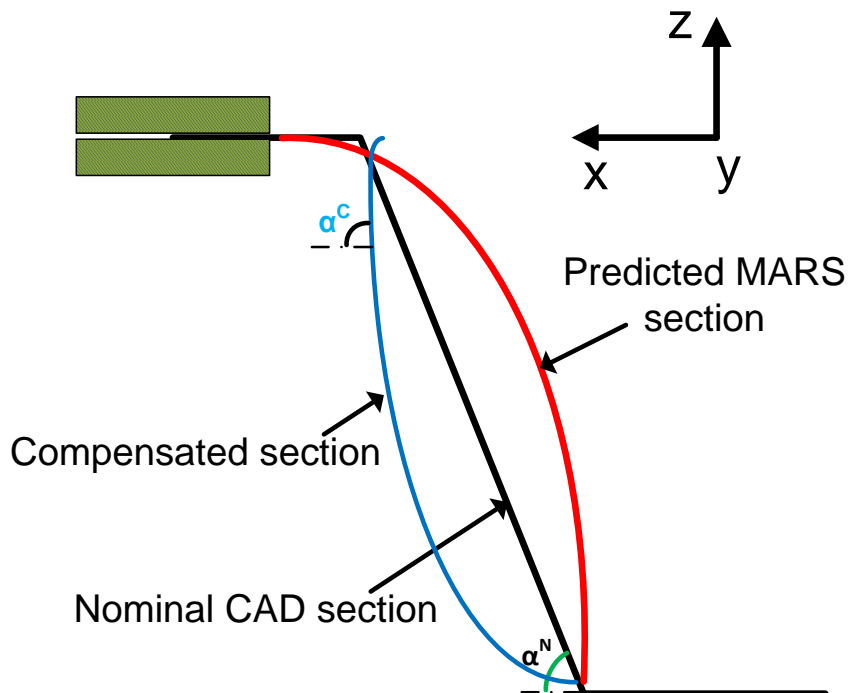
Compensated section showing wall angle higher than the wall angle of the nominal section
